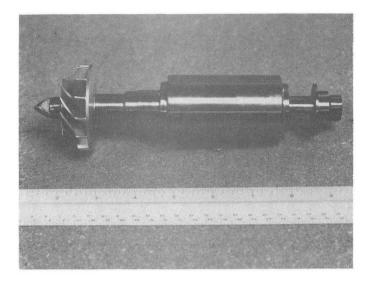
(CBB 831-461). A CHL turbine wheel and shaft assembly - scale in inches. Photo courtesy FNAL.
